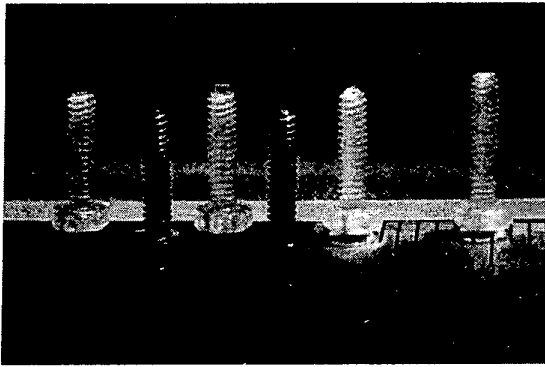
First developed SMP MPL Releasable Fastener Screws (M1x7.0mm) tested on various mobile phones. Mean disassembly time; ≈ 20 sec.
